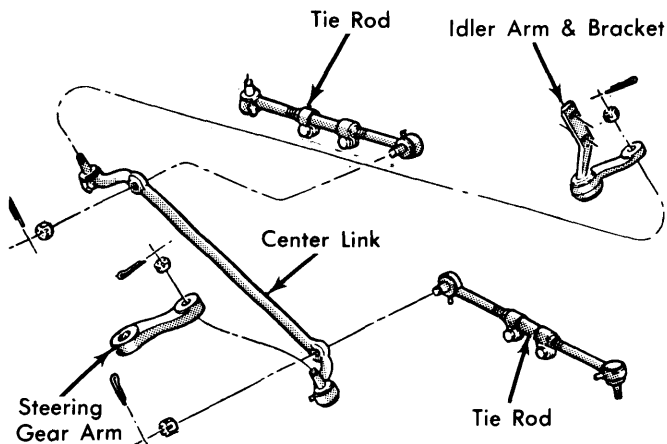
Disassembled View of Steering Linkage for "D", "AD" and "PD" Models
